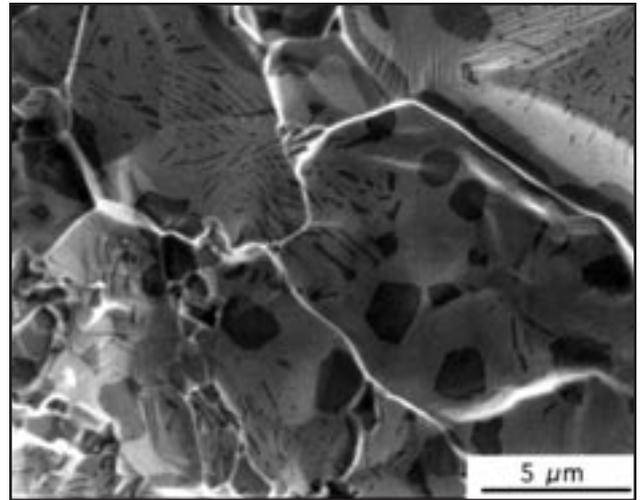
Fracture surface of a 99.8% Al₂O₃ tensile specimen that failed along the braze metal-ceramic interface. The exposed metallic surface shows almost no deformations.
